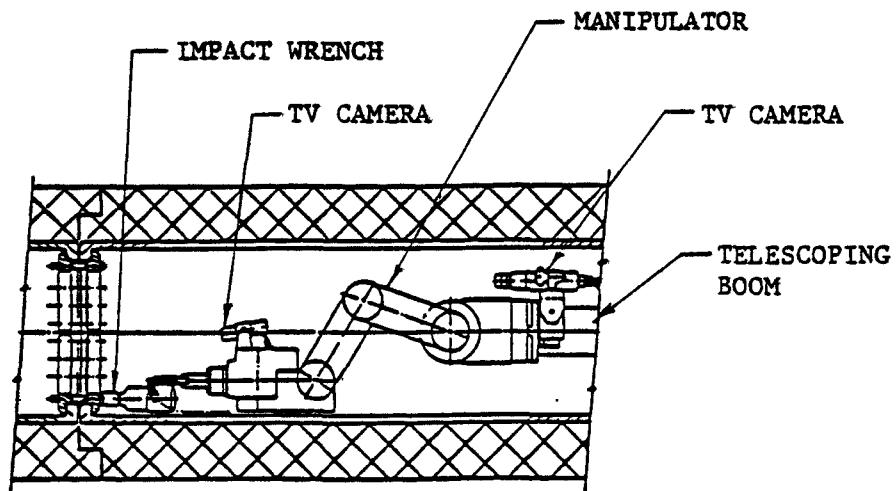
Captive Screw Clamp Assembly/Disassembly.
